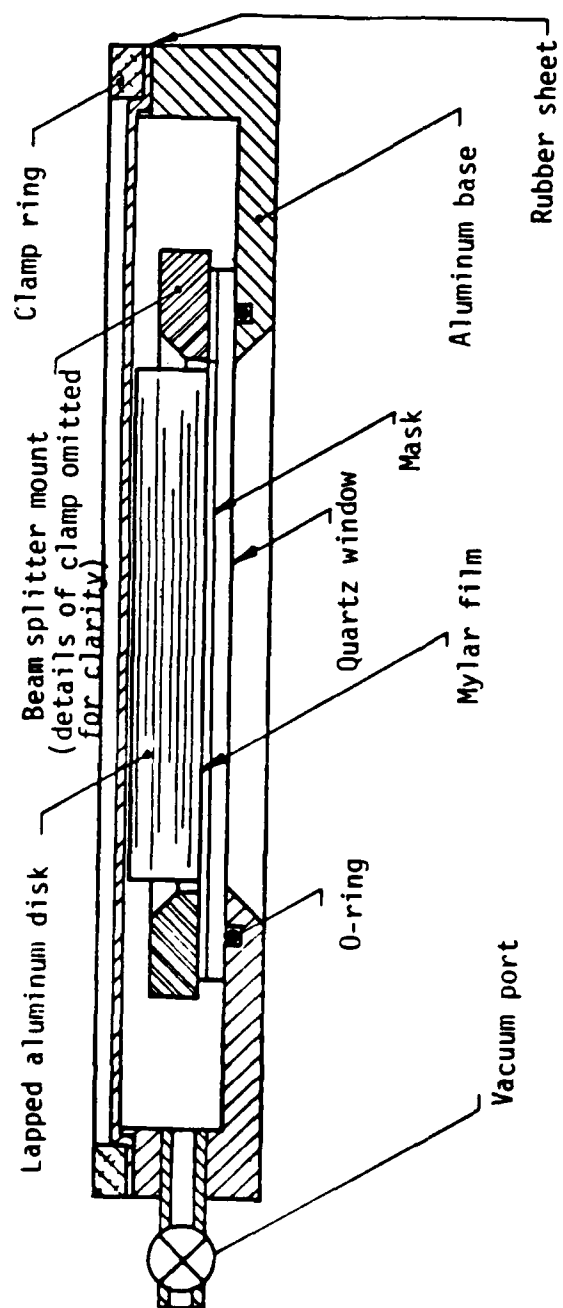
Assembly for exposing photoresist on aluminum coated Mylar film, not to scale.
